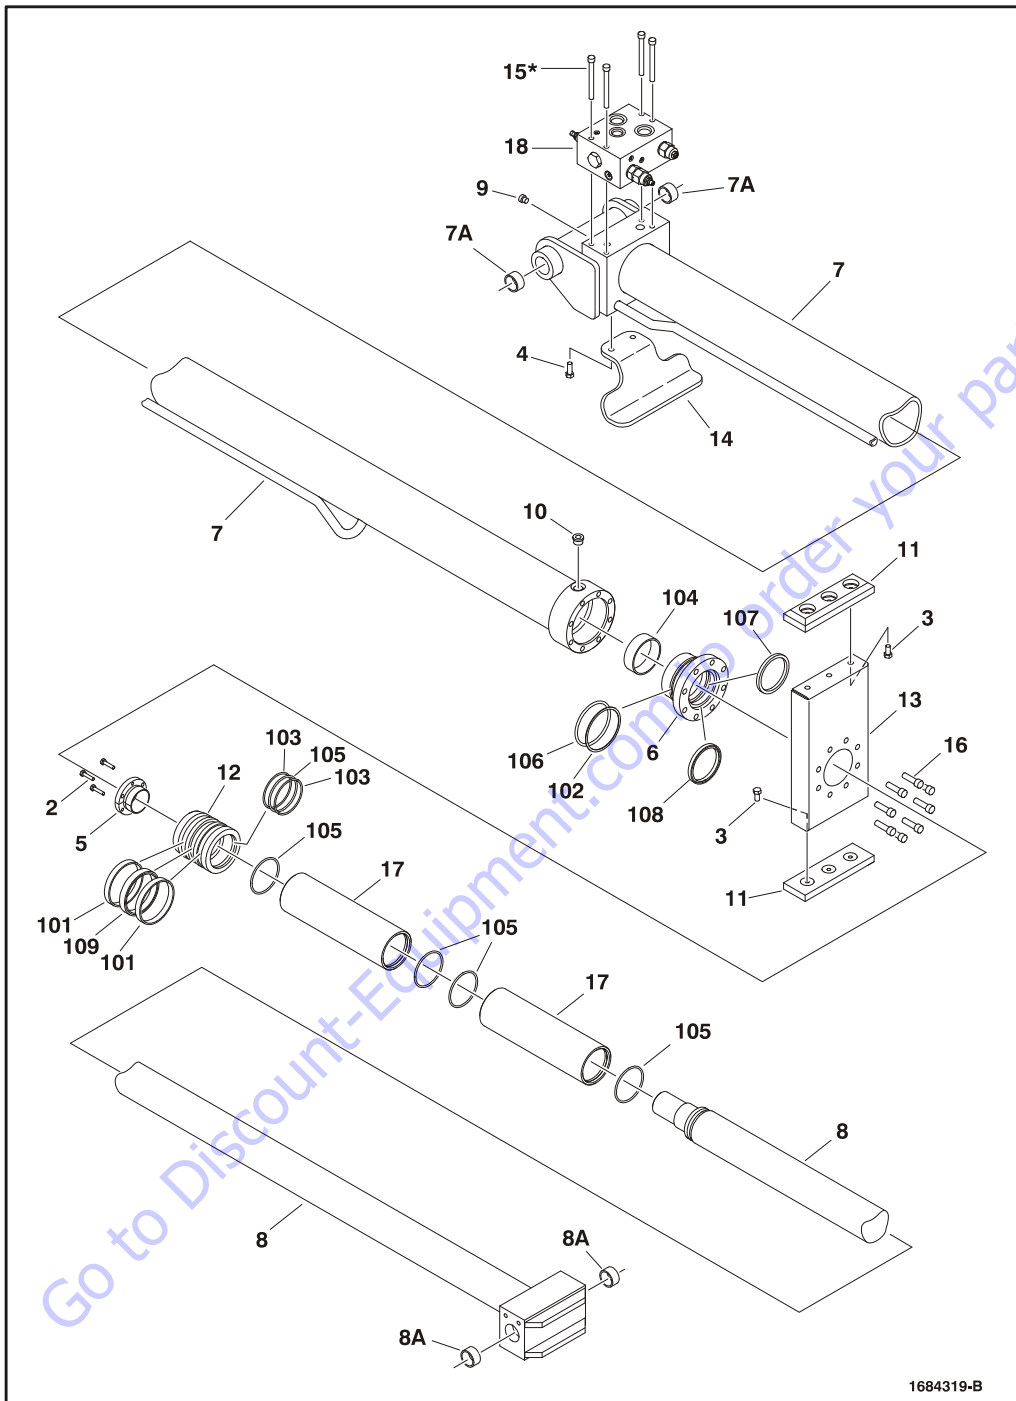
Tower Boom Telescope Cylinder (SN 0300201017 through 0300243458)
